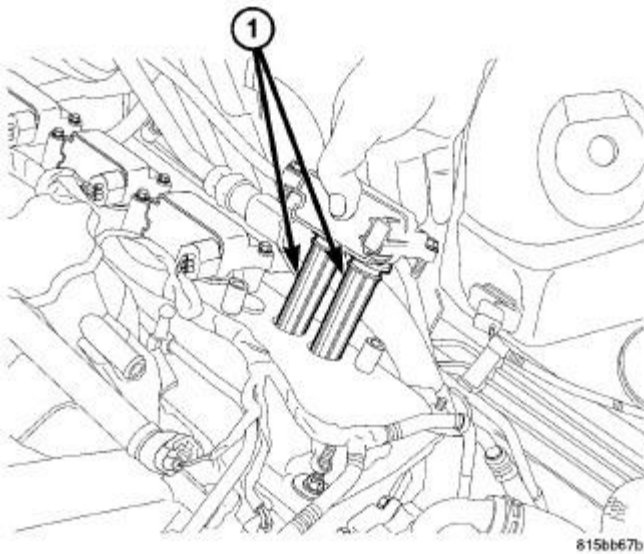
IGNITION COIL REMOVAL - 6.1L
